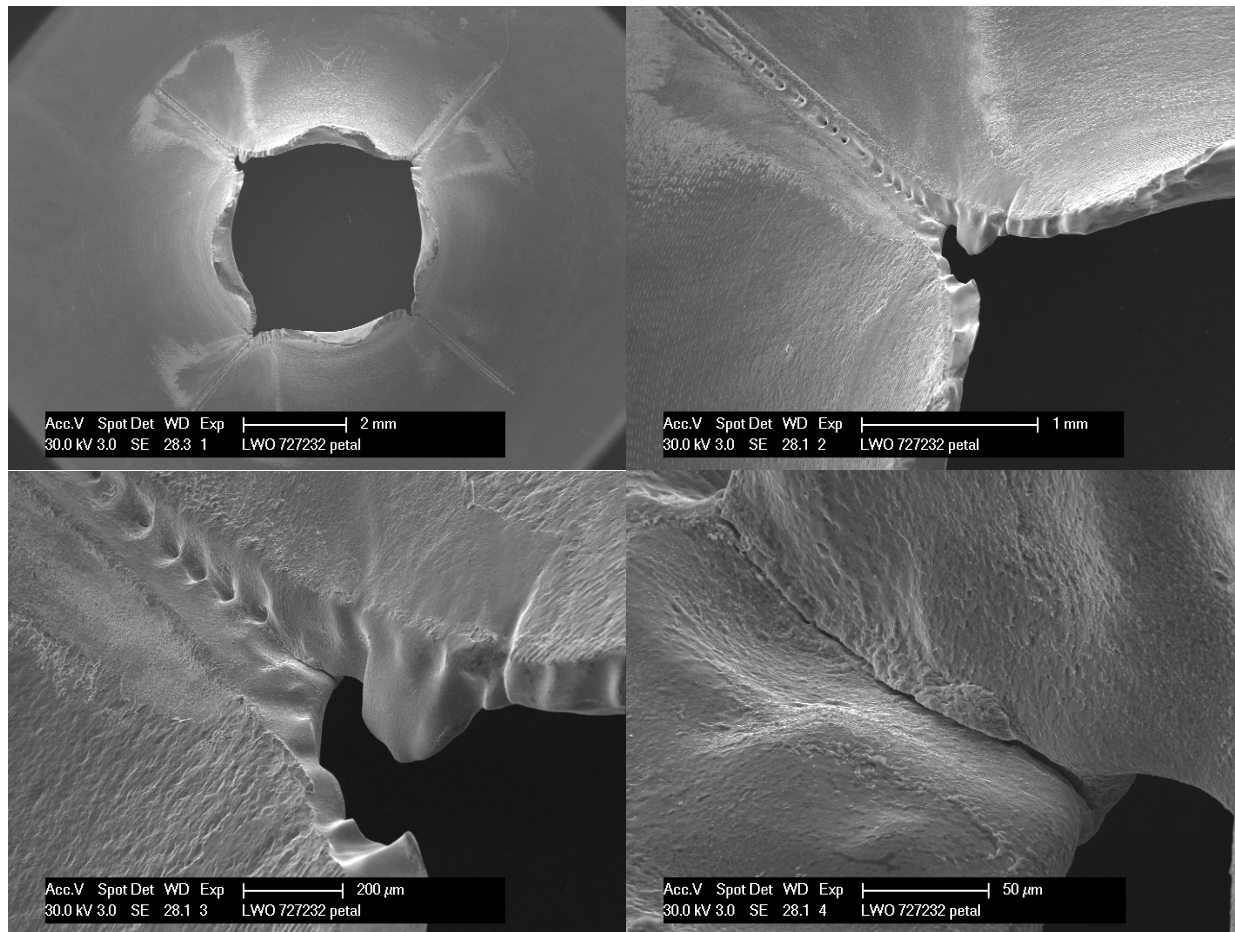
Disk dynamically burst, in the launcher, showing enhanced detail moving left to right of the upper right fracture surface. Note eroded fracture surfaces but overall ductile response of the material.
